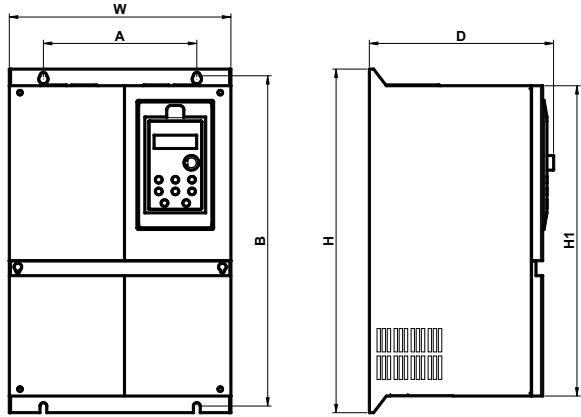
Schematic Diagram for Physical Dimensions and Mounting Dimensions (11kW~220kW)
